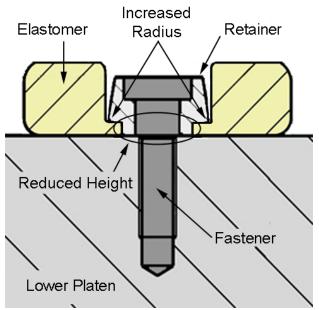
Illustration of the cross-section of the two-part seal assembly.
